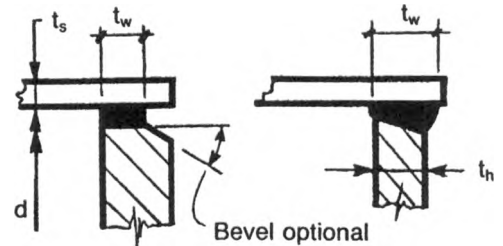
Case 8: Welded flat heads (Full penetration welds required) [1, Figure UG-34(g)].
